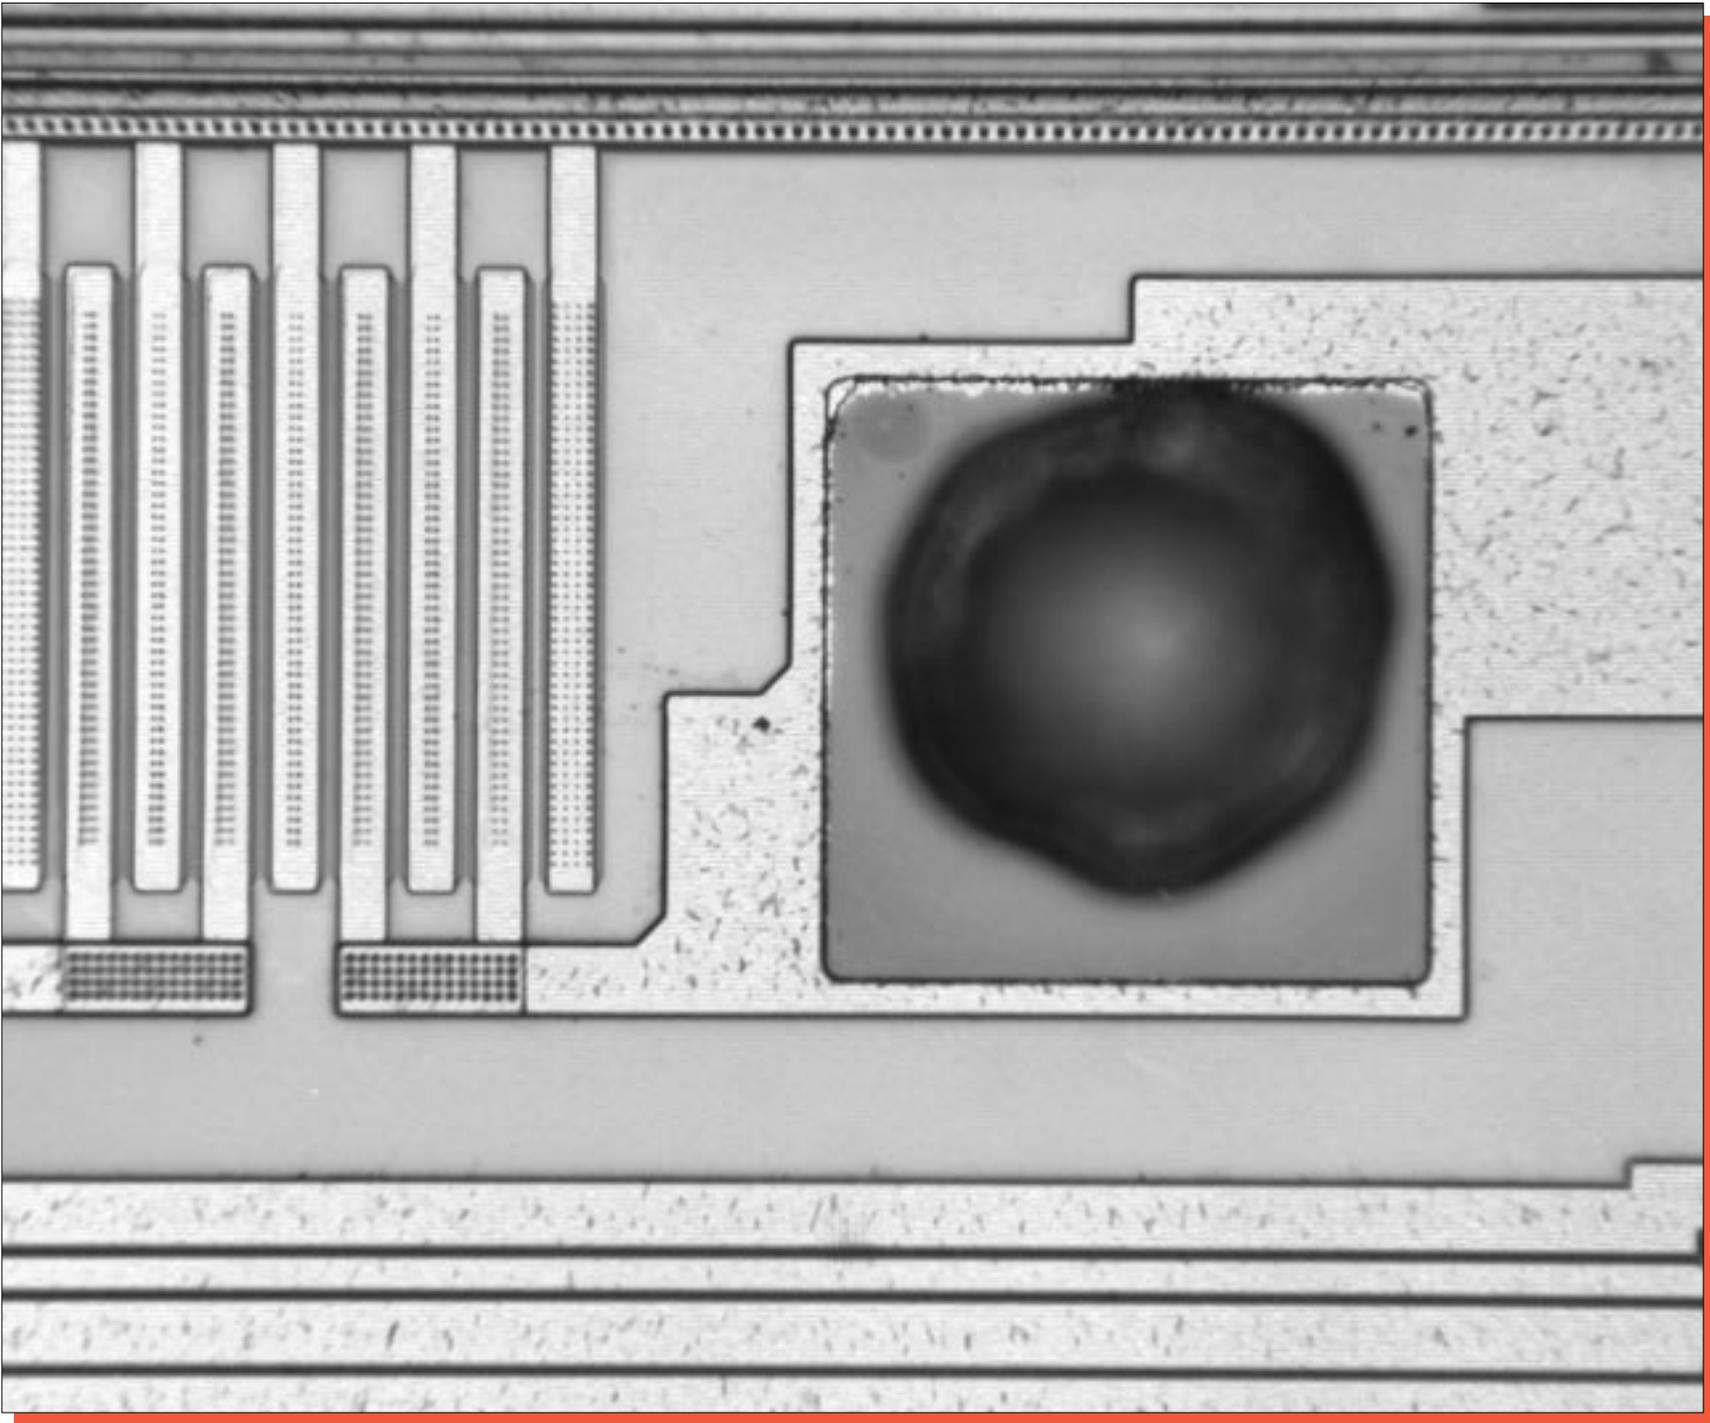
Optical view of Block A. Intact, Mag. 820x.
